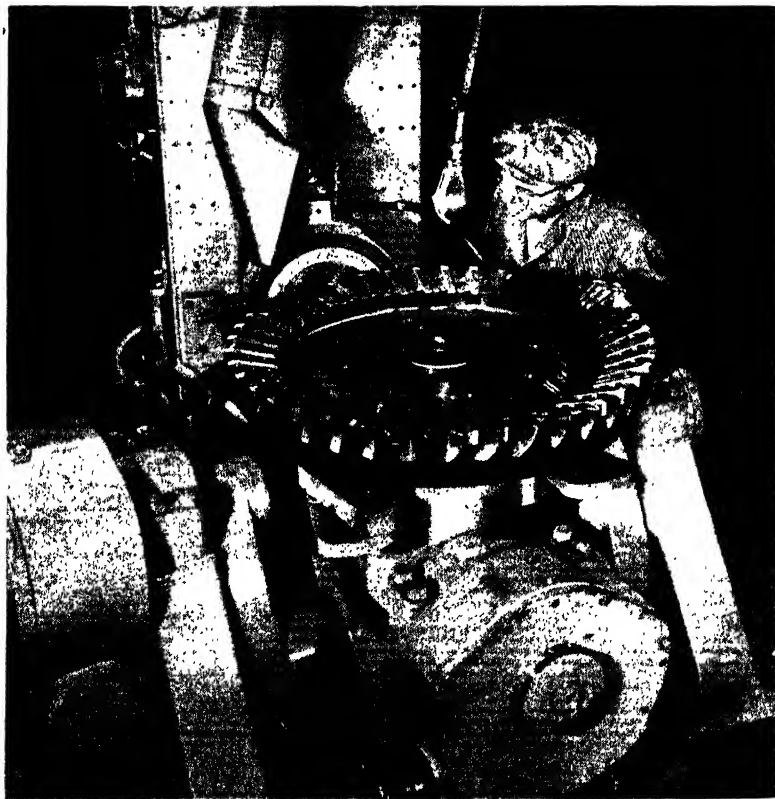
Milling Machine in which Cutters up to 36 Inches in Diameter are Used for Machining Three Sides of Transmission Cases Simultaneously
